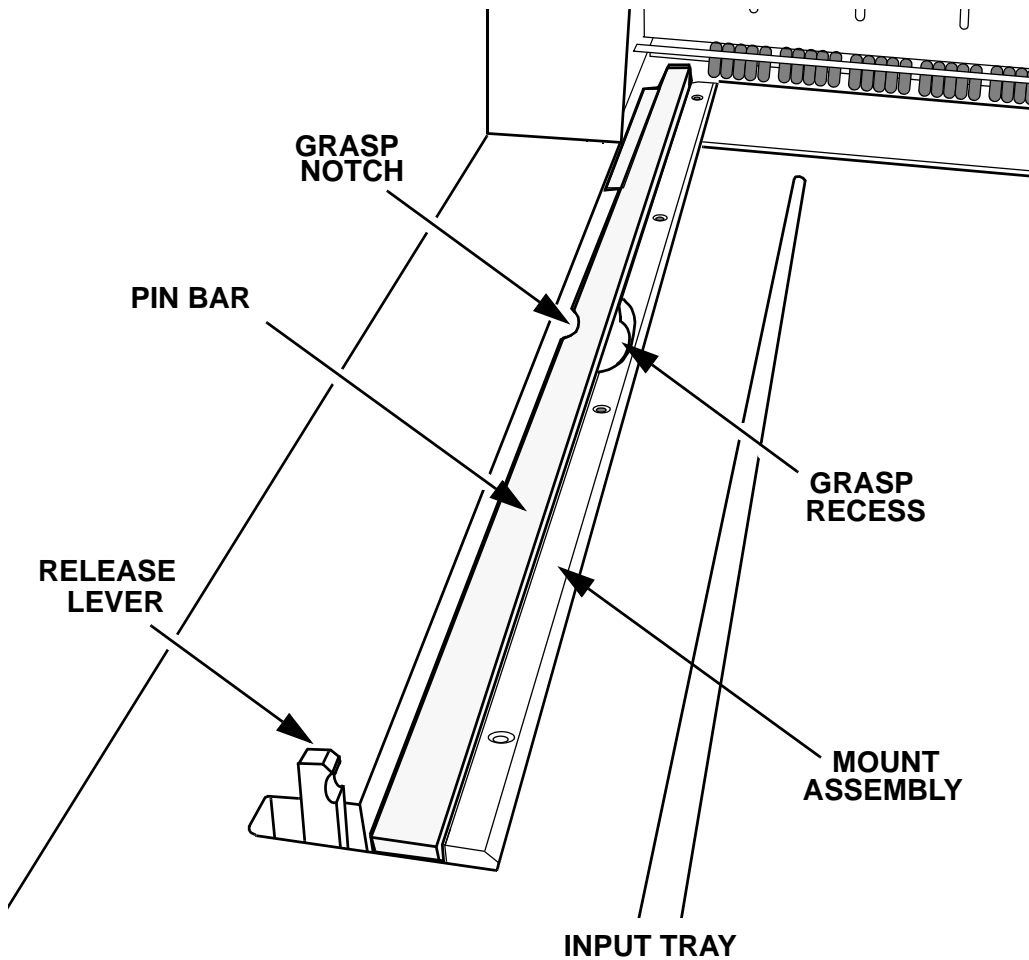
Pin Bar (in place in the pin bar mount assembly)
